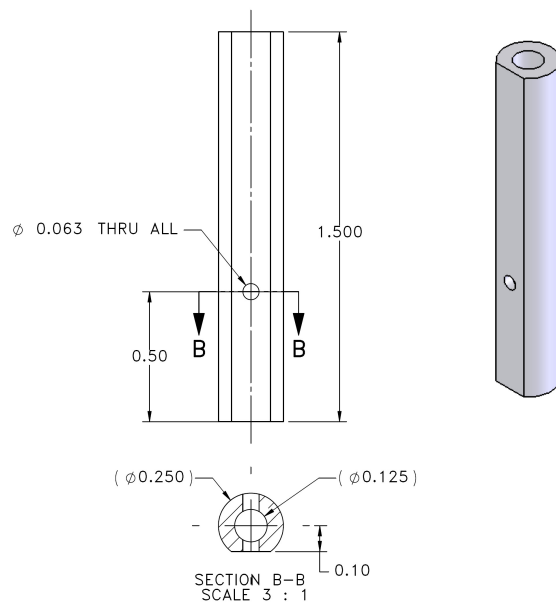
Technical drawing of one of the three RFA ceramic tubes. All measurements are in inches
